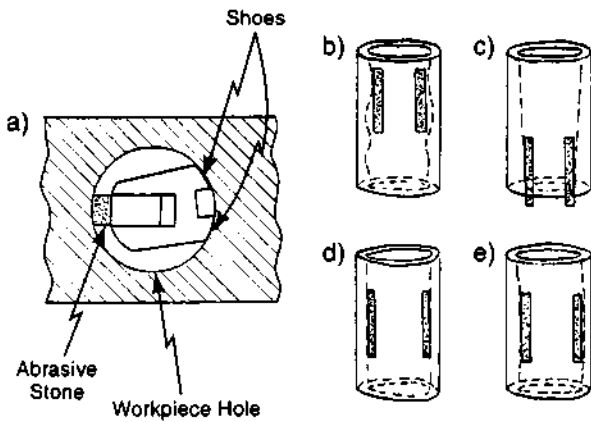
J1 Honing. a) end section view of typical single-stone abrasive honing tool in a hole. Views b) through e) show, greatly exaggerated, hole discrepancies that are improved by honing: b) waviness, c) taper, d) out-of-roundness, e) bowed shape.
